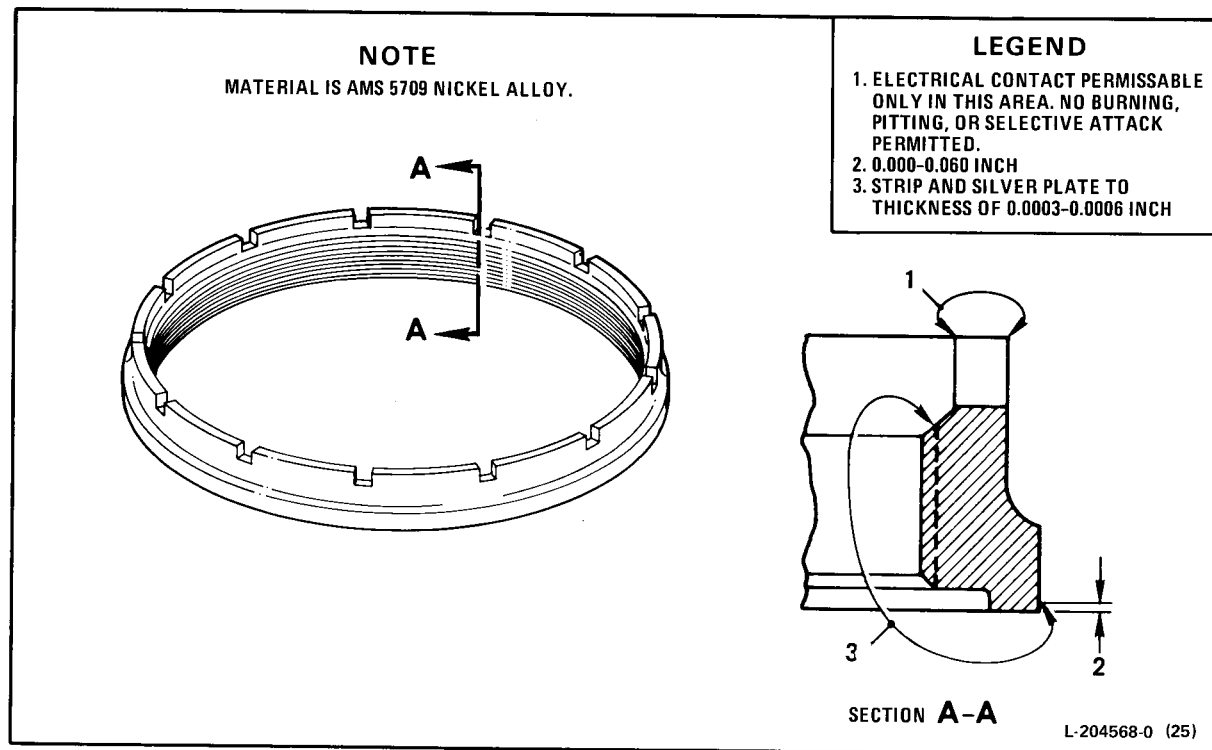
Bearing Retaining Nut (PN 4007568) - Silver Plate Replacement
